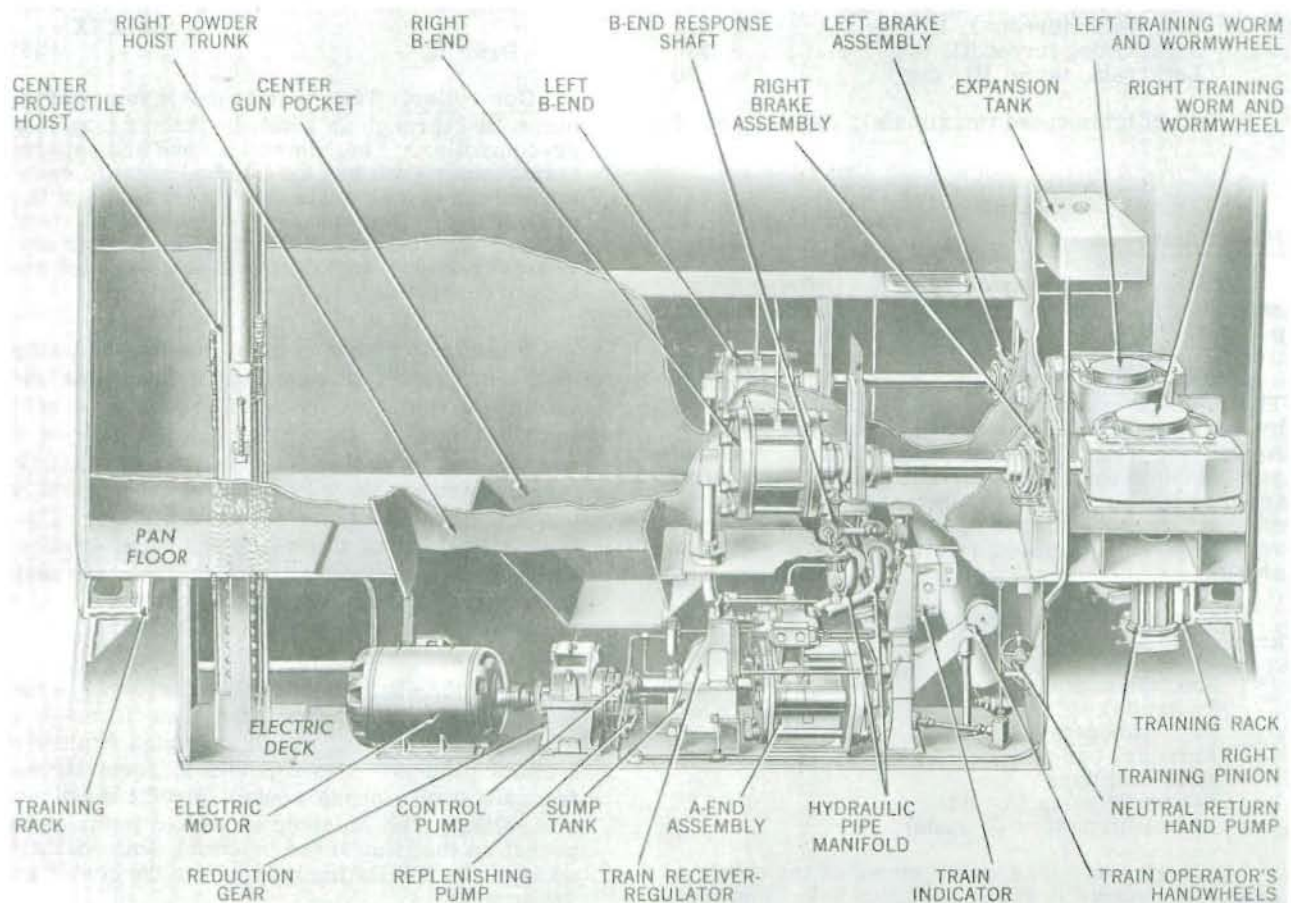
16-inch Training Gear Mk 2 Mod 0 Power Drive, General Arrangement
